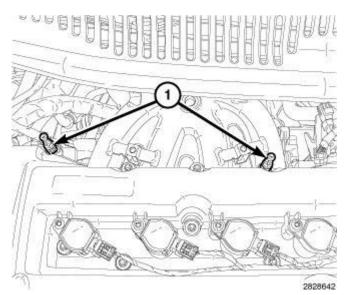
Engine Cover Mounting Posts Courtesy of CHRYSLER LLC
